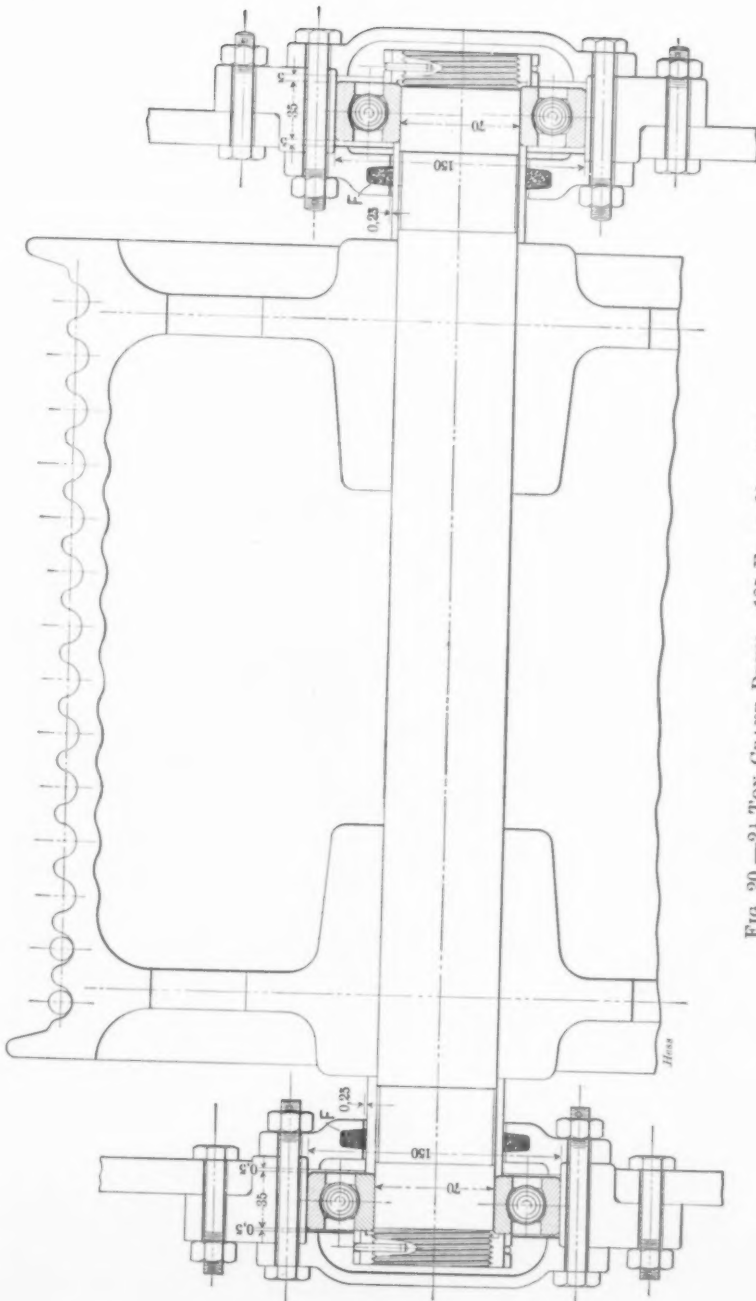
2½-TON CRANE DRUM. 185 FT. P. MIN. LIFT.
